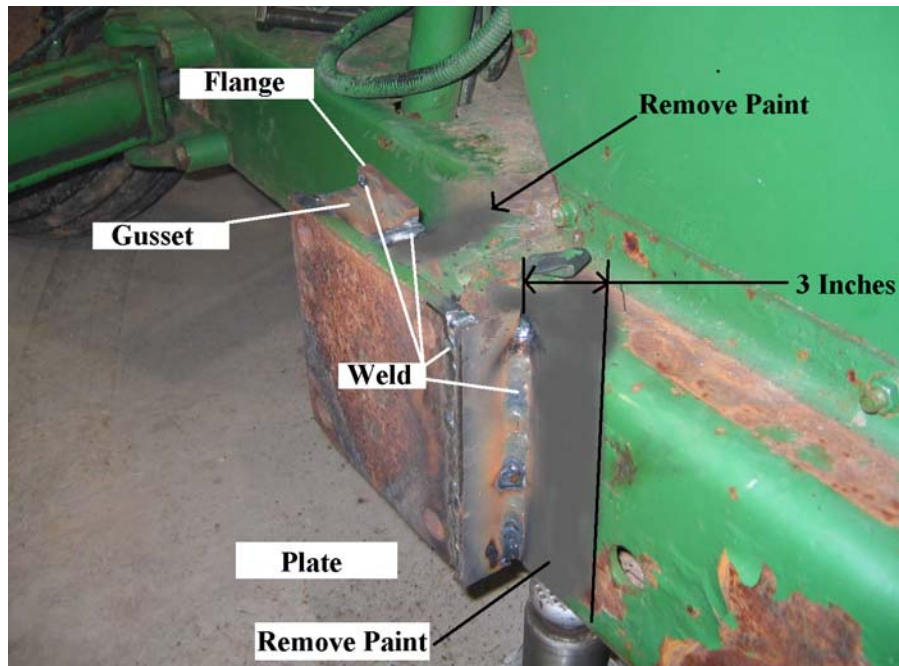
Installation of Frame Supports, LH Side (View from Rear)
